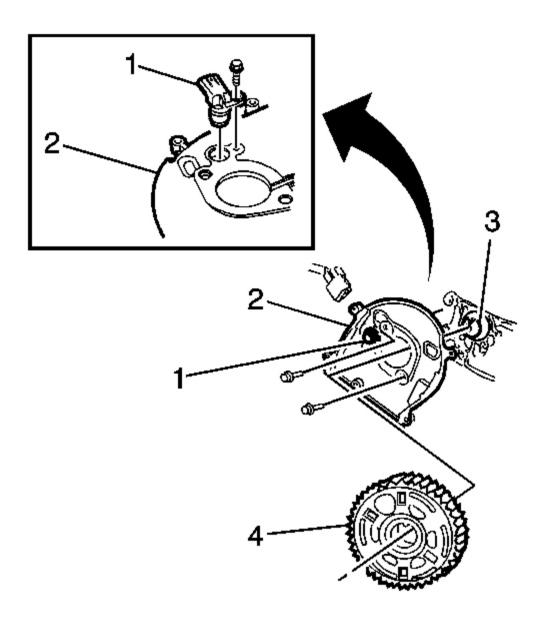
View Of Camshaft Position (CPM) Sensor Courtesy of GENERAL MOTORS CORP.
